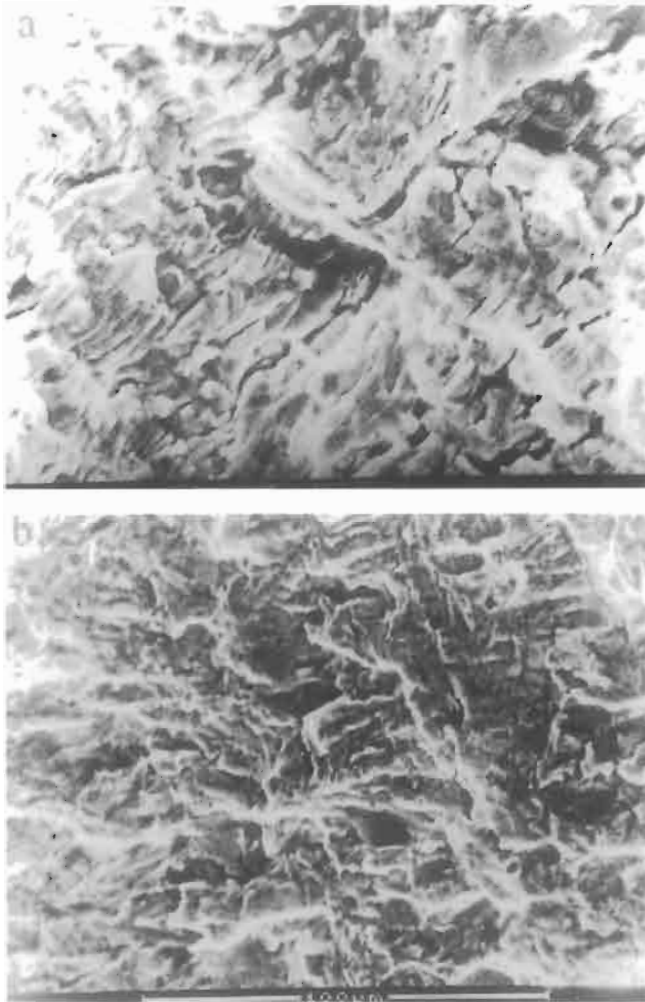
Photographs of the fracture surfaces taken in the SEM. (a) 1#; (b) 2#.
